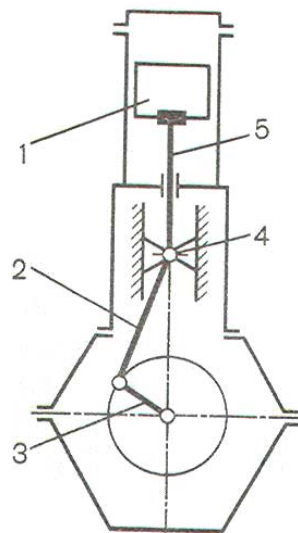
Crosshead CSM: 1 - piston; 2 - connecting rod; 3 - crank of the crankshaft; 4 - crosshead; 5 – stock
